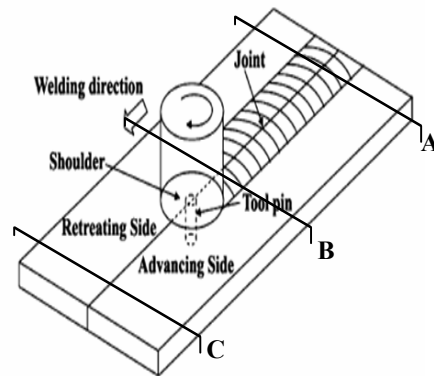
Schematic illustrations of the friction stir welding process [3].
